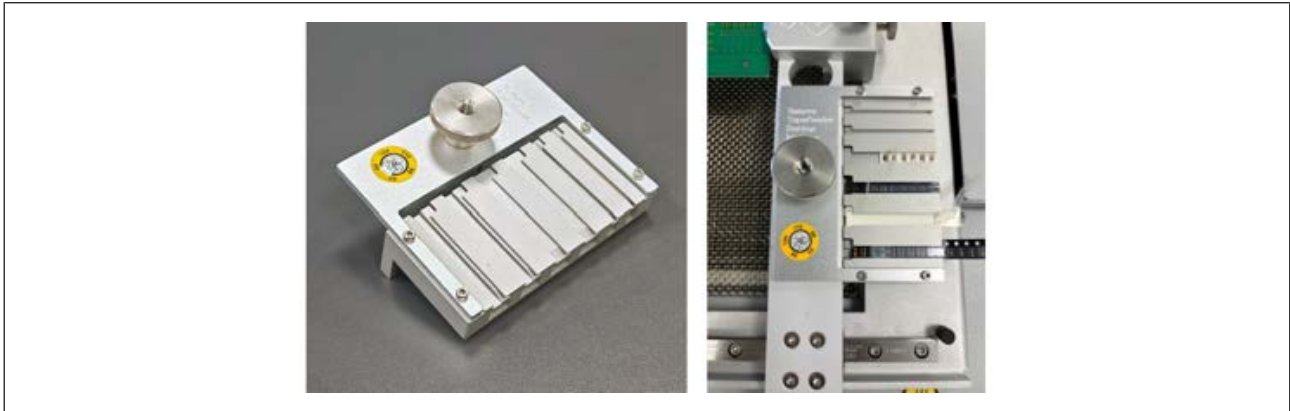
Left: Tapefeeder. Right: Tape feeder mounted on the circuit board holder. Tape feeder mounted on the circuit board frame, several component belts are inserted.
